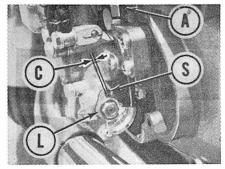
View of the oil injection pump. When idle speed is correctly set, clearance (C) should be slightly less than 0.02 inch.
